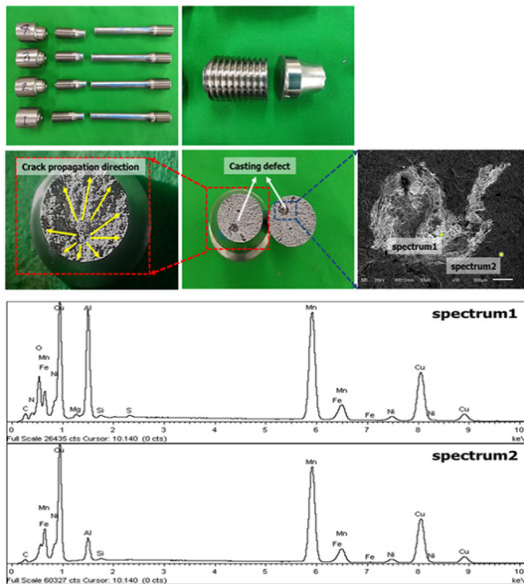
After tensile test, specimen fracture casting defect and EDS result
